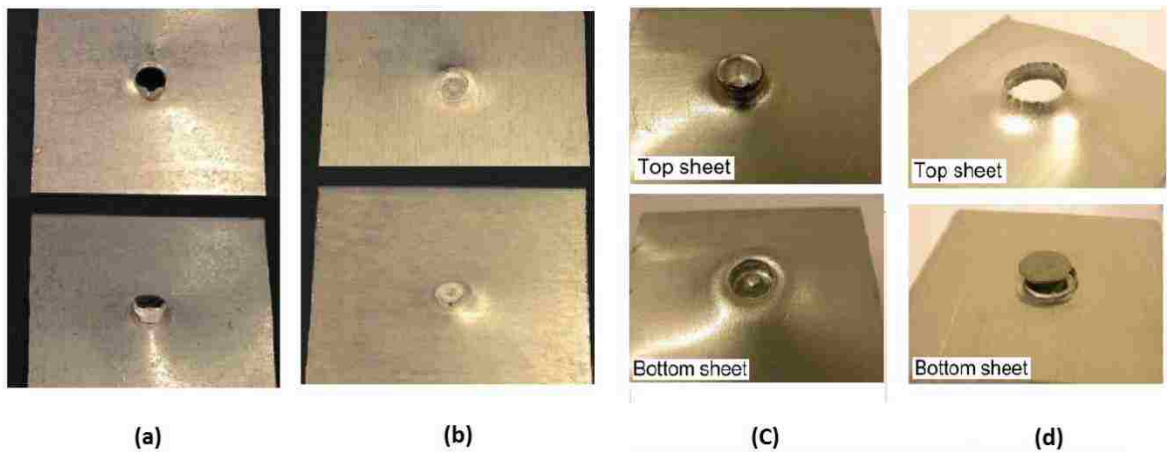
Most common failure mode in welded and riveted joints: (a) nugget pulled-out, (b) nugget shearing, (c) rivet tail pull-out (d) rivet head pull-out [29] [33]
